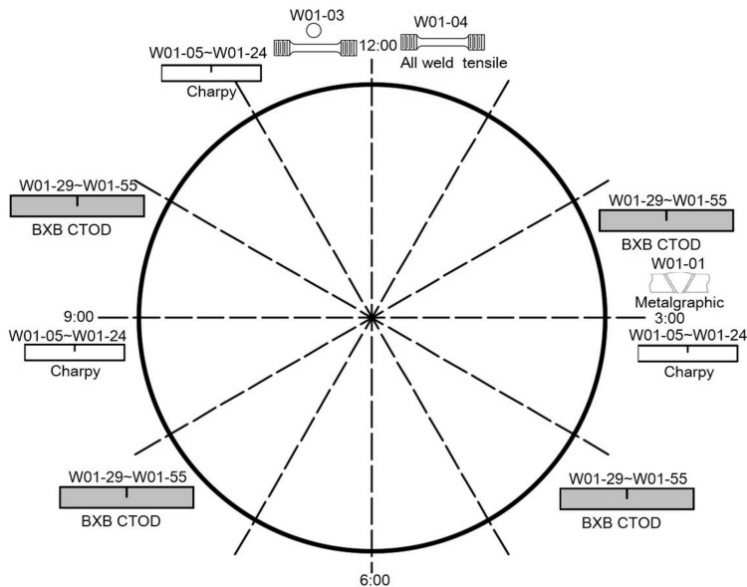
Schematic showing specimen extraction from a pipeline girth weld, a critical component in Iraq's oil and gas infrastructure where fracture toughness is paramount [19].
